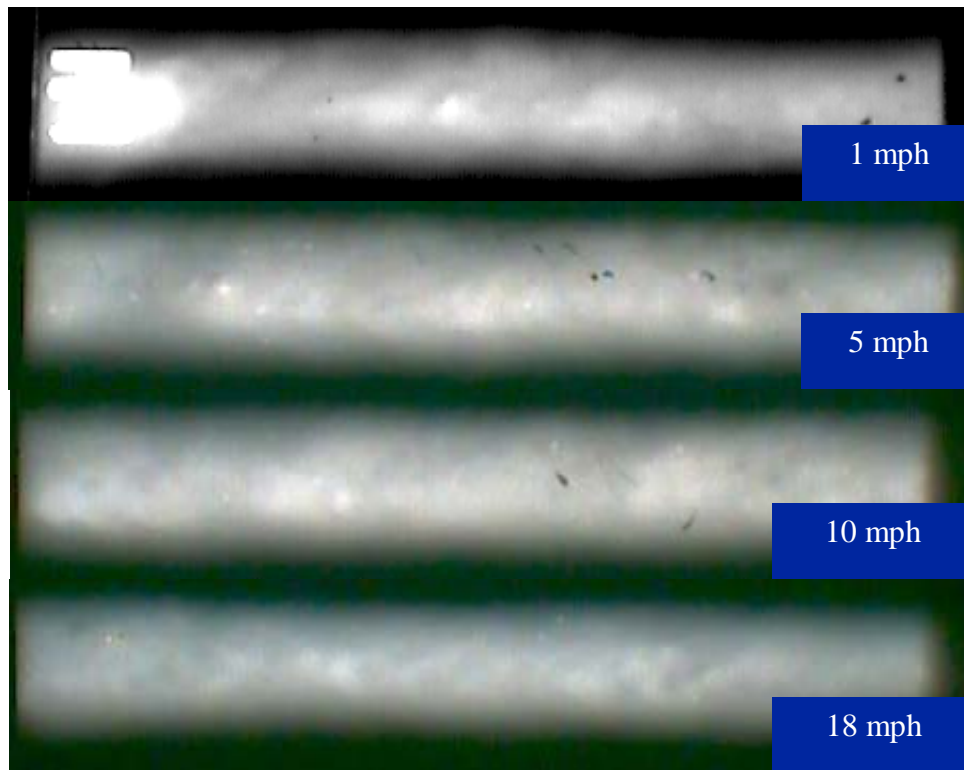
Radiographs of Bead-on-Plate Welds Deposited Under Different Wind Conditions Using an E70T-6 FCAW-S Consumable
